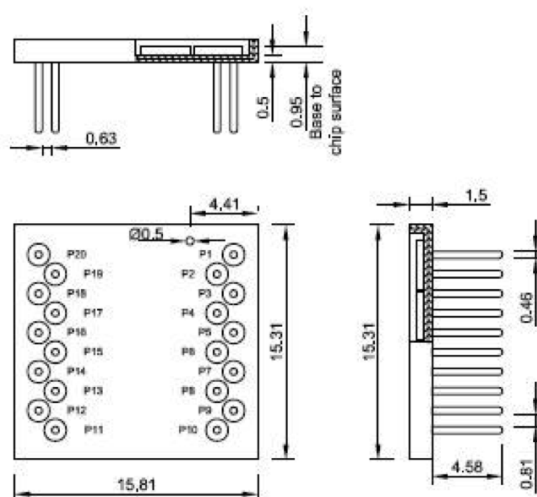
Bottom (pin side) and side views of the ArraySB-4 sensor package showing pin layout and naming.
